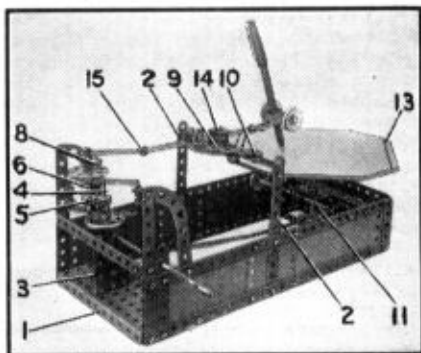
A simple Meccanograph which produces a variety of interesting and beautiful designs. It can be built with a No. 4 Outfit and a Gears Outfit "A."
